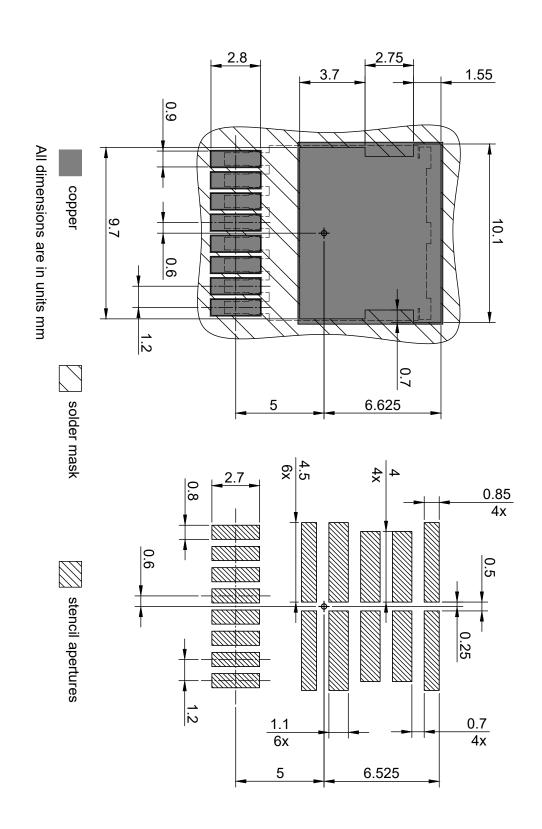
Outline Footprint (PG-HSOG-8), dimensions in mm
